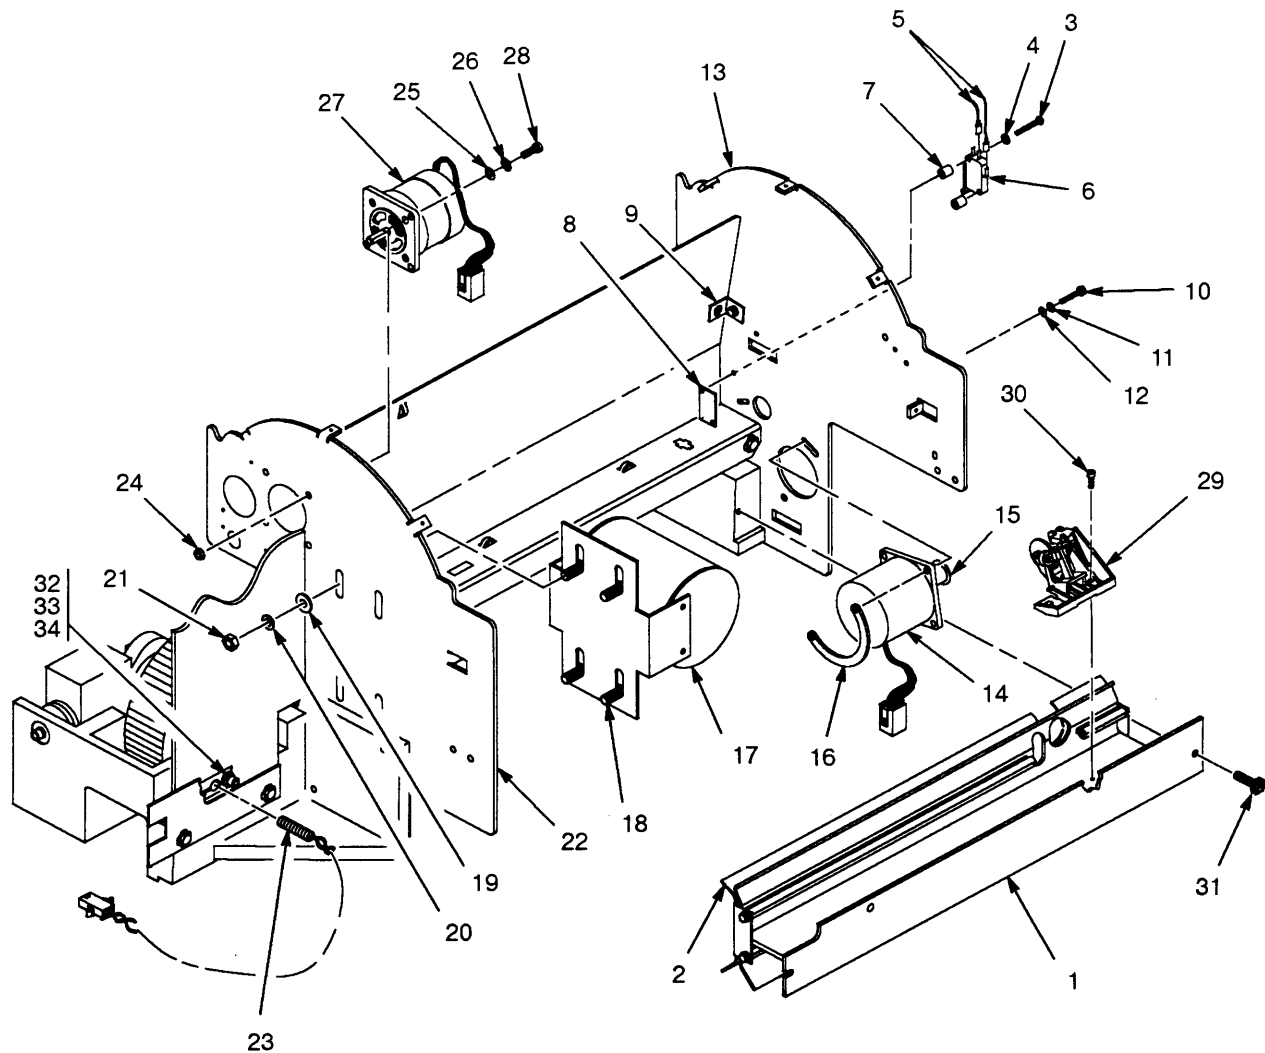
Paper Feed Motor, Platen Open Motor and Switch, and Paper Out Switch
